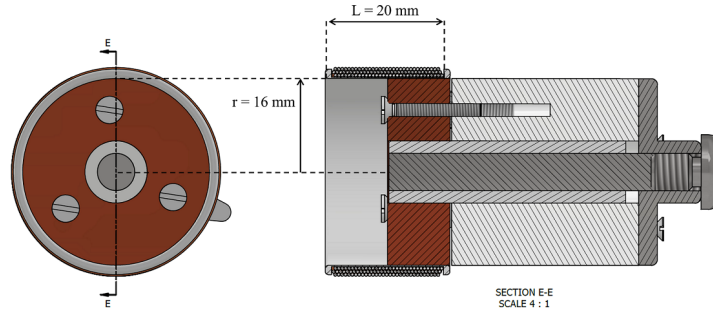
Thruster geometries of magnetic coil positioning for a coil of 20 mm length and 32 mm diameter with ~ 100 turns.
